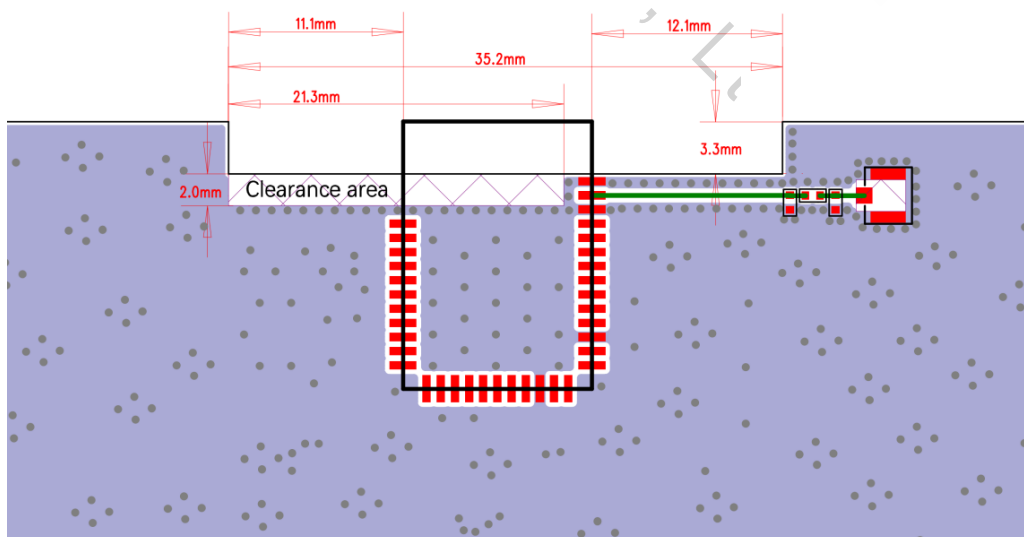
Module Layout - Baseboard TOP Layer
